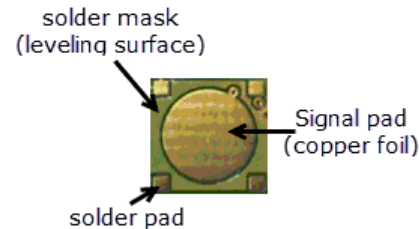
Top view of a single force sensing unit shows the shape of the solder mask layer that supports the copper beryllium plate. The copper beryllium plate is soldered to the four pads in the corners.
